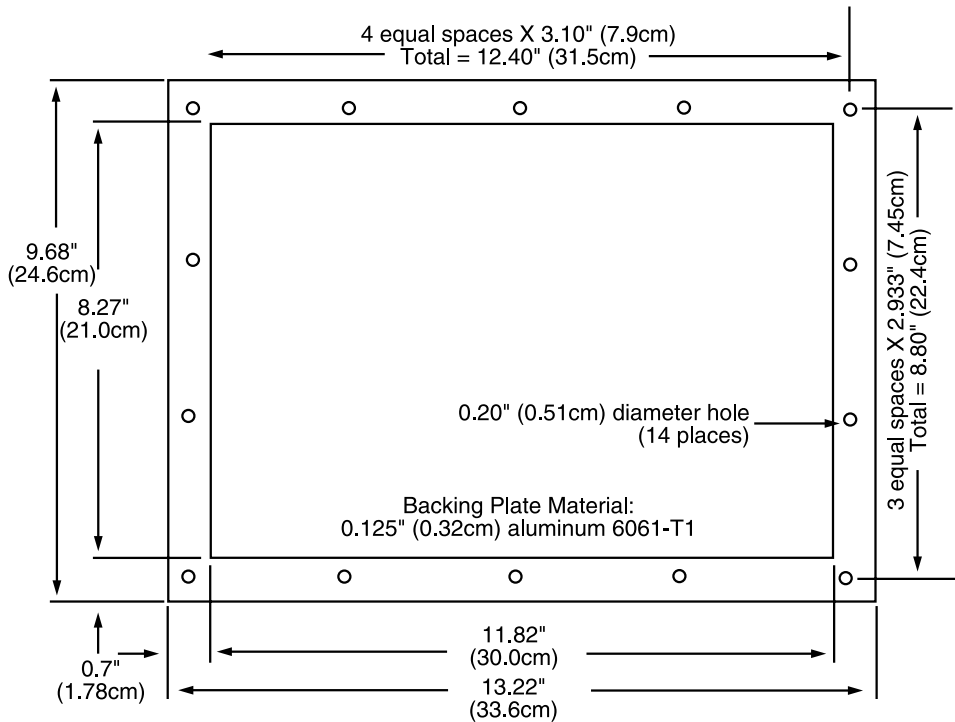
Mechanical Dimensions of Mounting Kit (Symbol P/N 59-16256-01) Backing Plate
